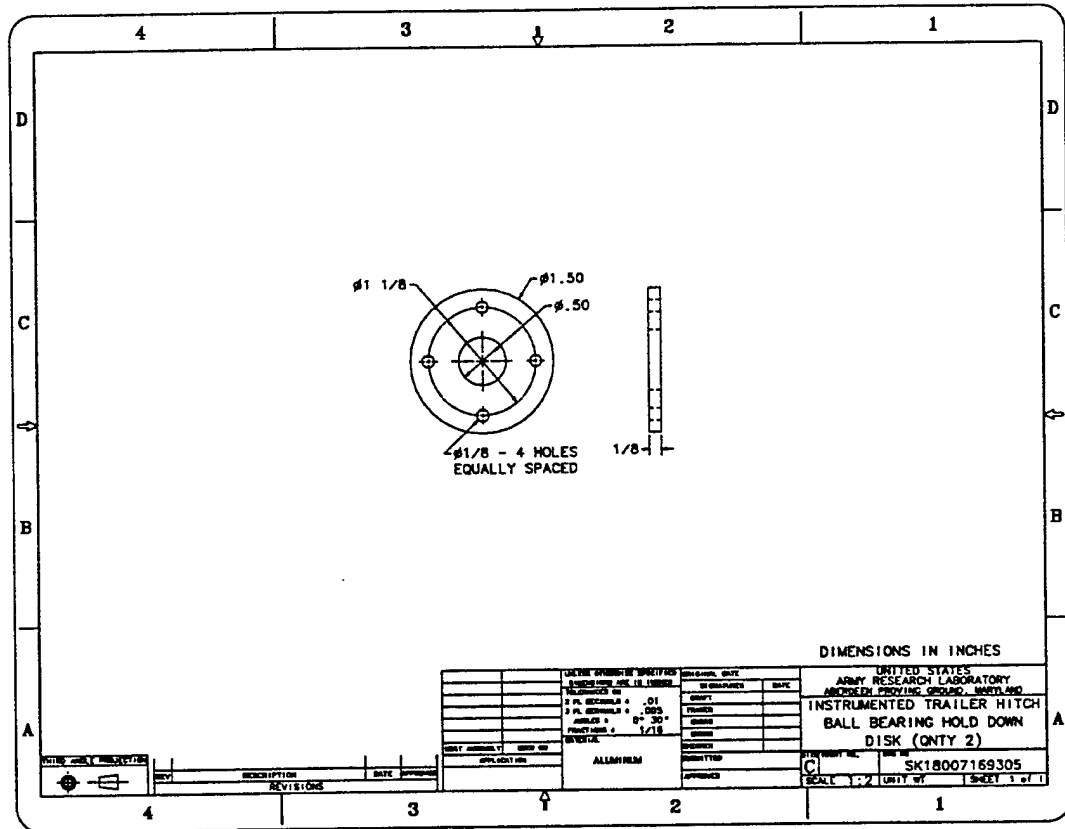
Bearing Hold-Down and Pivot Shaft.
